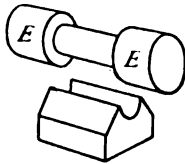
MAIN SLIDE VALVE AND ACTUATING PISTON.
